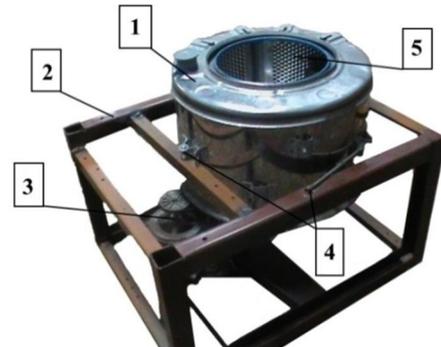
External view of developed experimental equipment of hydro-centrifugal method of headwear forming: 1 - forming chamber; 2 - installation frame; 3 - electric motor; 4 - drum fastening to the equipment; 5 - drum
